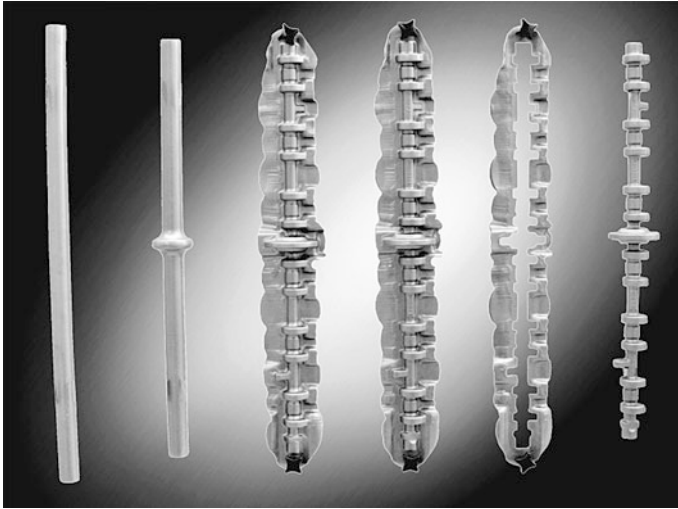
Manufacturing sequence in the forging of eccentric shafts for Valvetronic systems; bar section–pre-upsetting blank–preliminary stage–finished stage–flash section–heat-calibrated finished forged piece, length 562 mm (Source Hirschvogel Umformtechnik GmbH)
